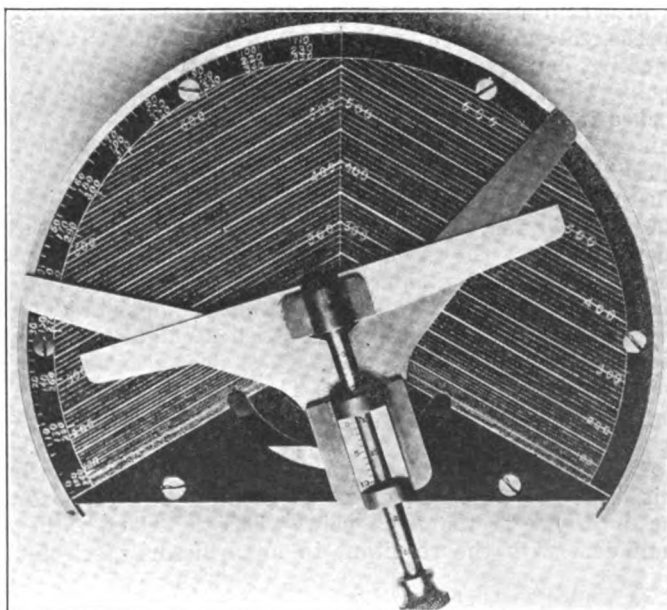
CUT METER THAT INDICATES THE AMOUNT OF MATERIAL THAT MUST BE REMOVED FROM A CRANKSHAFT TO SECURE BALANCE
